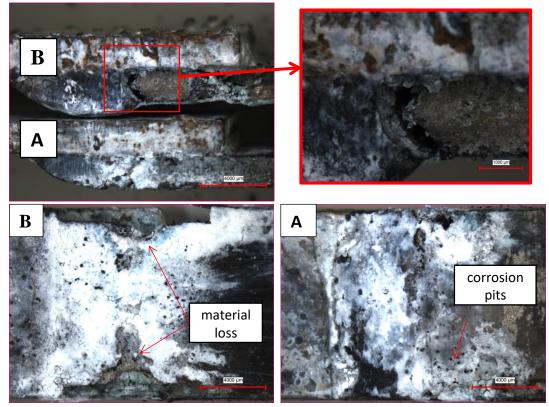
Tensile test specimens after corrosion test on Sample A and Sample B
